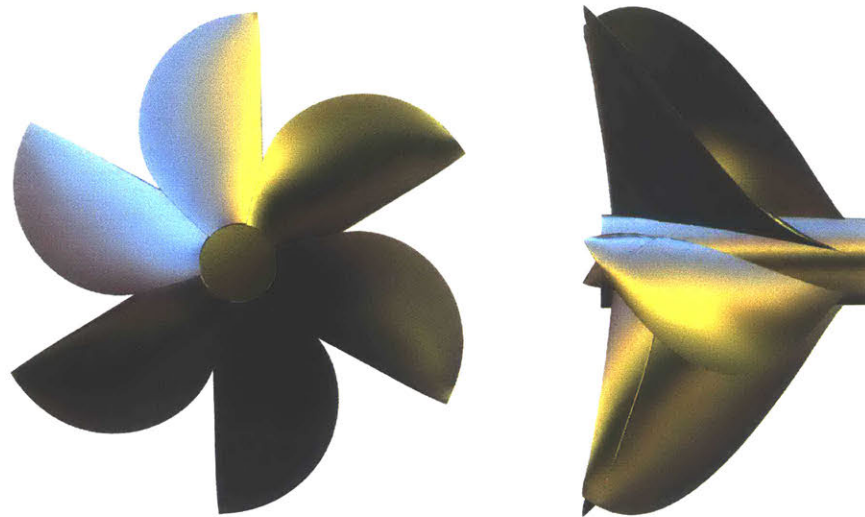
J5T* Propeller Final Design (front and side views)
